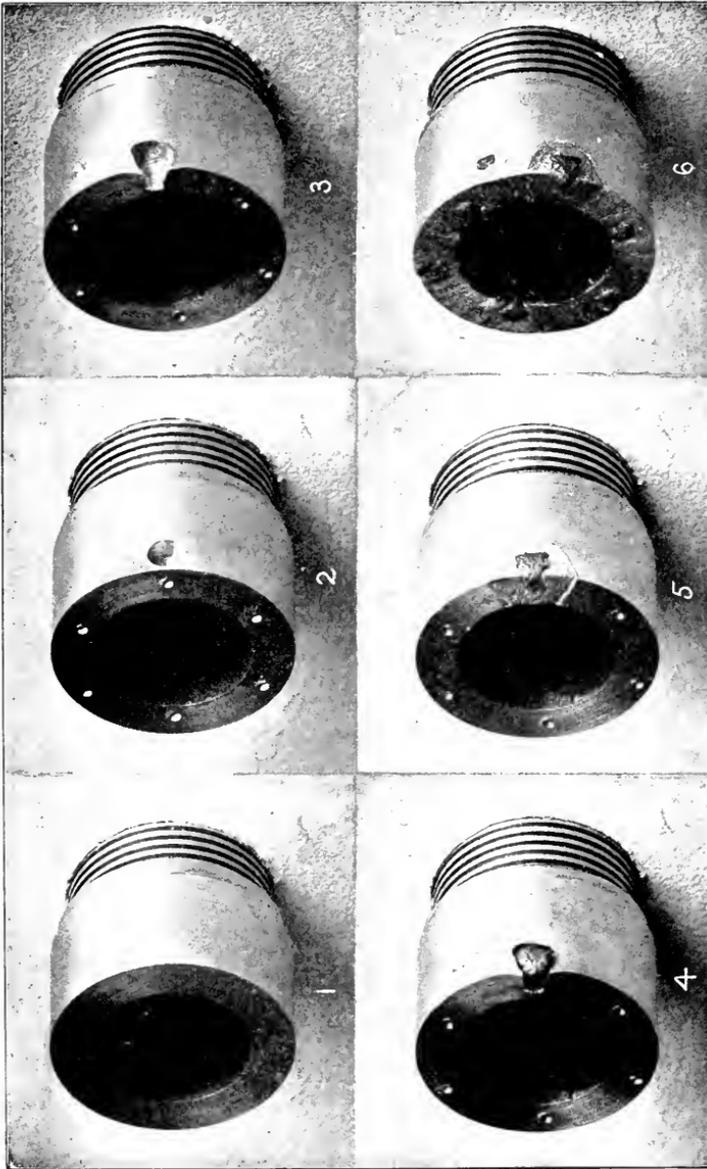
SETTING DIAMONDS IN DRILL BITS.
